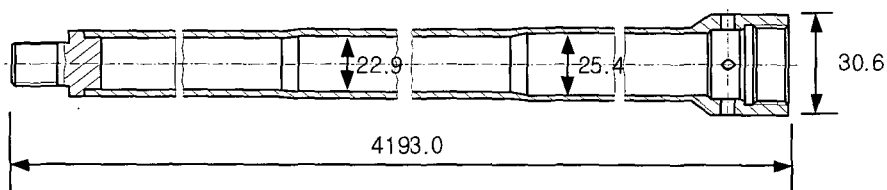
Guide tube in a fuel assembly(unit : mm)
